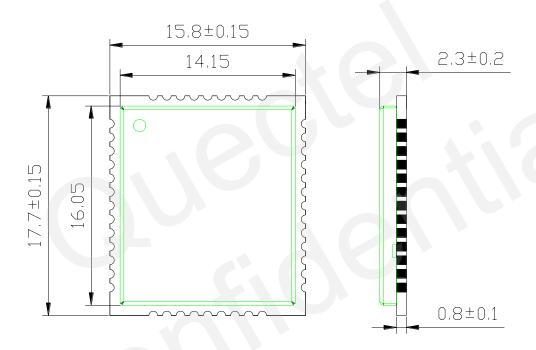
M66-OpenCPU Module Top and Side Dimensions (Unit: mm)
